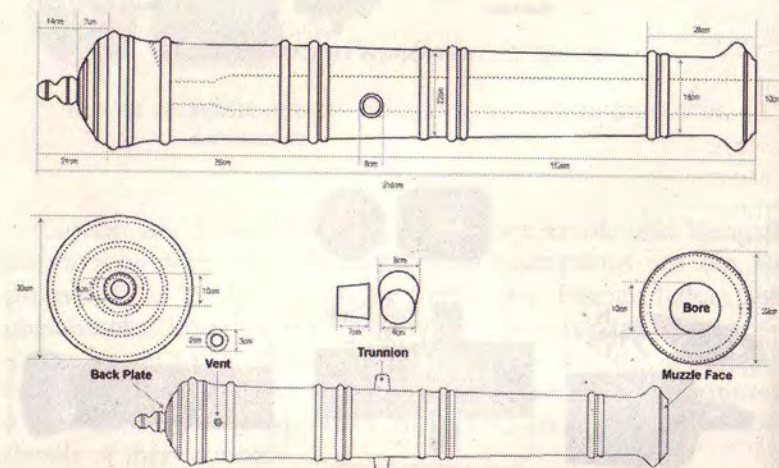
THE FORGE WELDED IRON CANNON #3.
